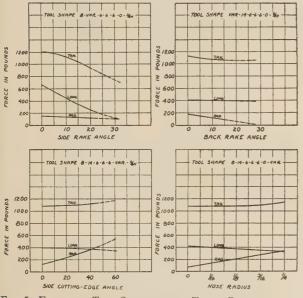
Effect of Tool Shape on the Three Components of CUTTING FORCE
